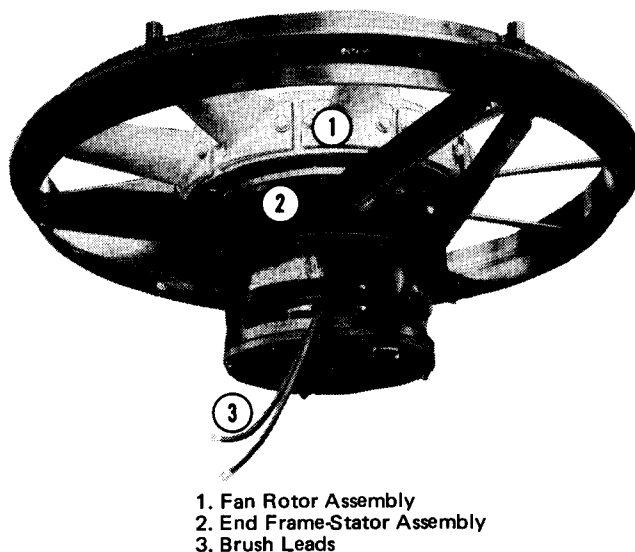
Current Grid Fan And Motor Assembly - 0.914 m (36'') Fan
